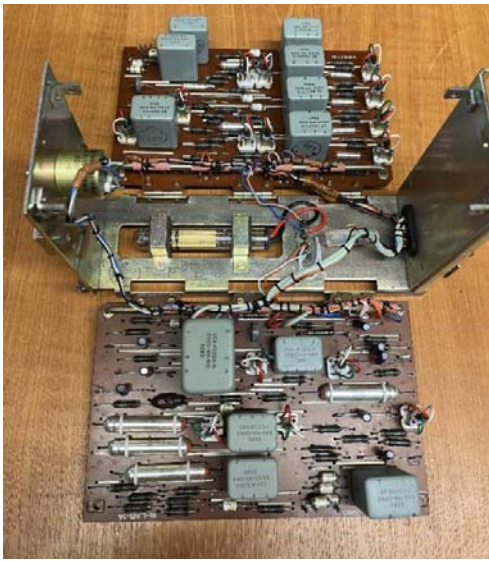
One of the PCBs opened out for inspection/repair. This particular PCB is the transmit amplifier, pilot oscillator and carrier supply. Note the 32 kHz crystal in the centre frame
